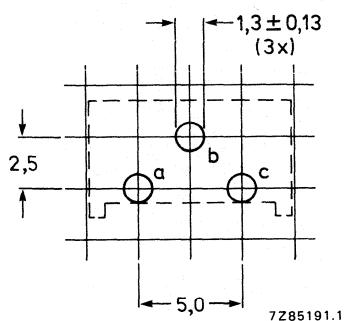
Hole pattern for vertical versions, viewed from component side.
